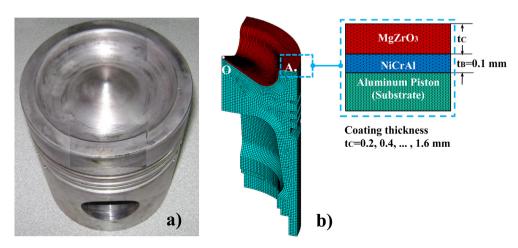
The piston used in the FE analyses: a) photograph of the piston used diesel engine, b) meshing a quarter of the model and coating parameters.
